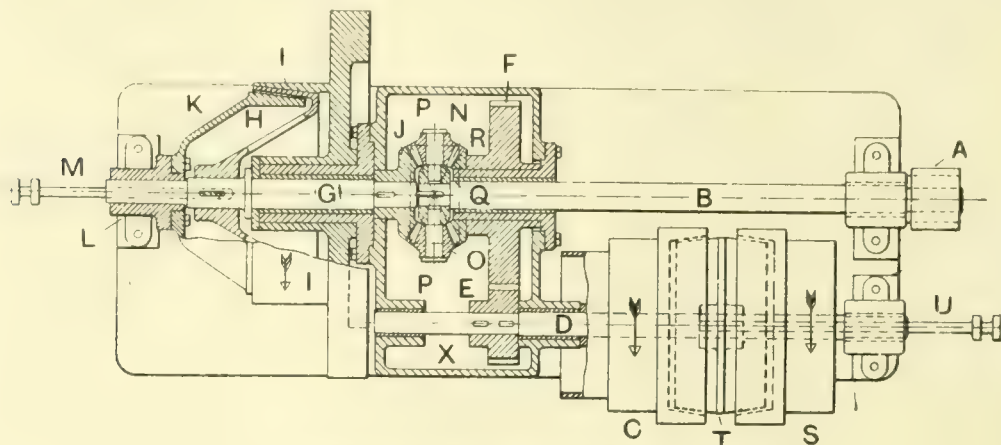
REVERSING MECHANISM FOR PLANING MACHINES.
